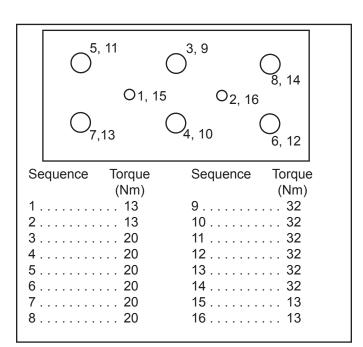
BA-922® Compressor Head Bolt Torque Sequence
